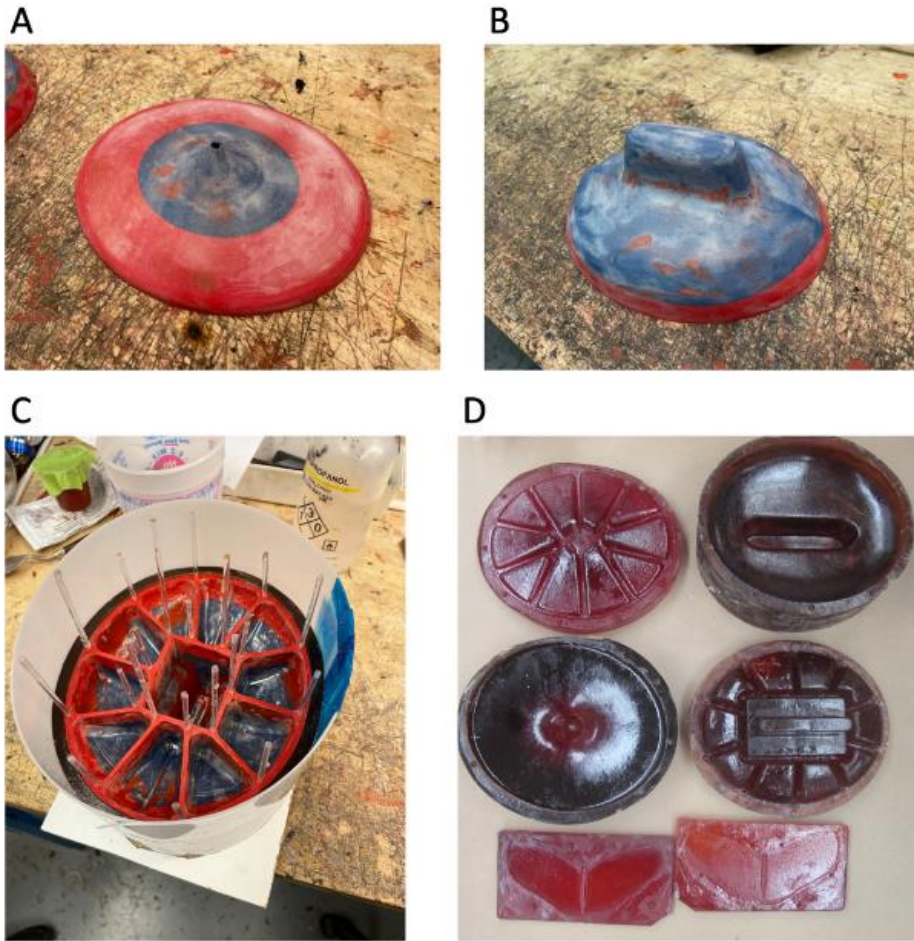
(A) Top mold master, (B) Bottom mold master, (C) Internal structures with the second half of the mold shown, the rods help with venting (D) Completed silicone molds
